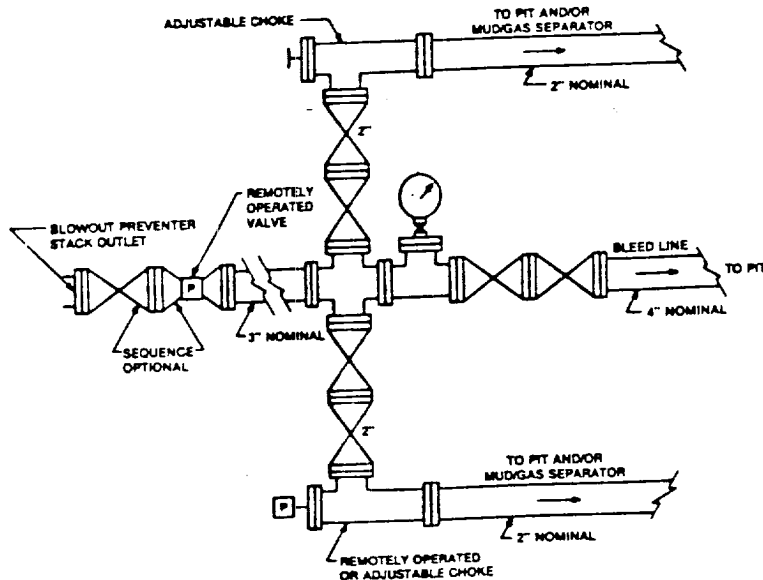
Typical choke manifold assembly for 5M rated working pressure service — surface installation.
